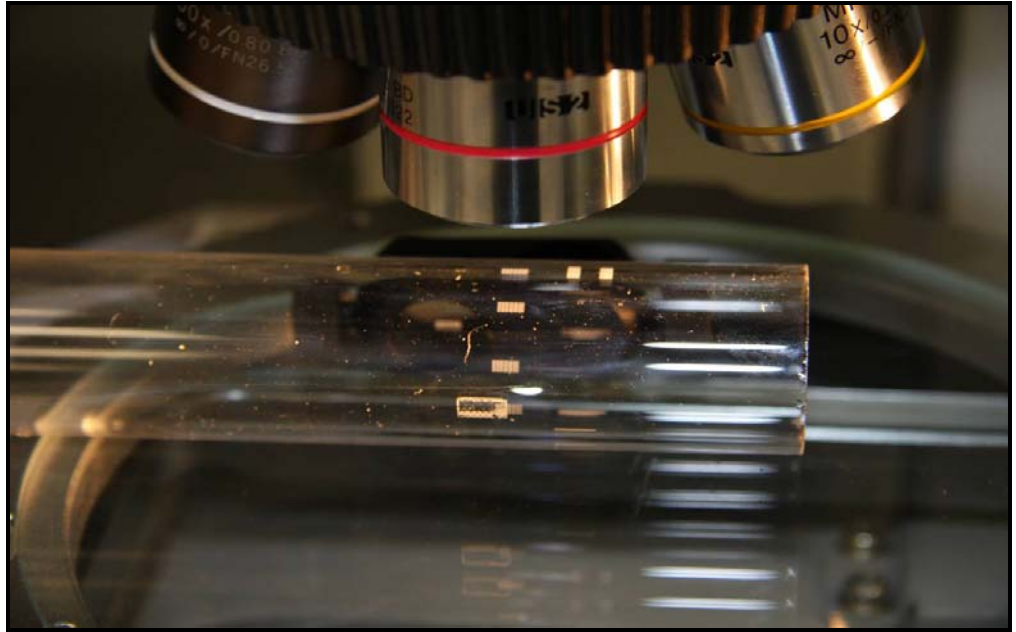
A macroscopic image of several bar codes machined into a quartz tube.
